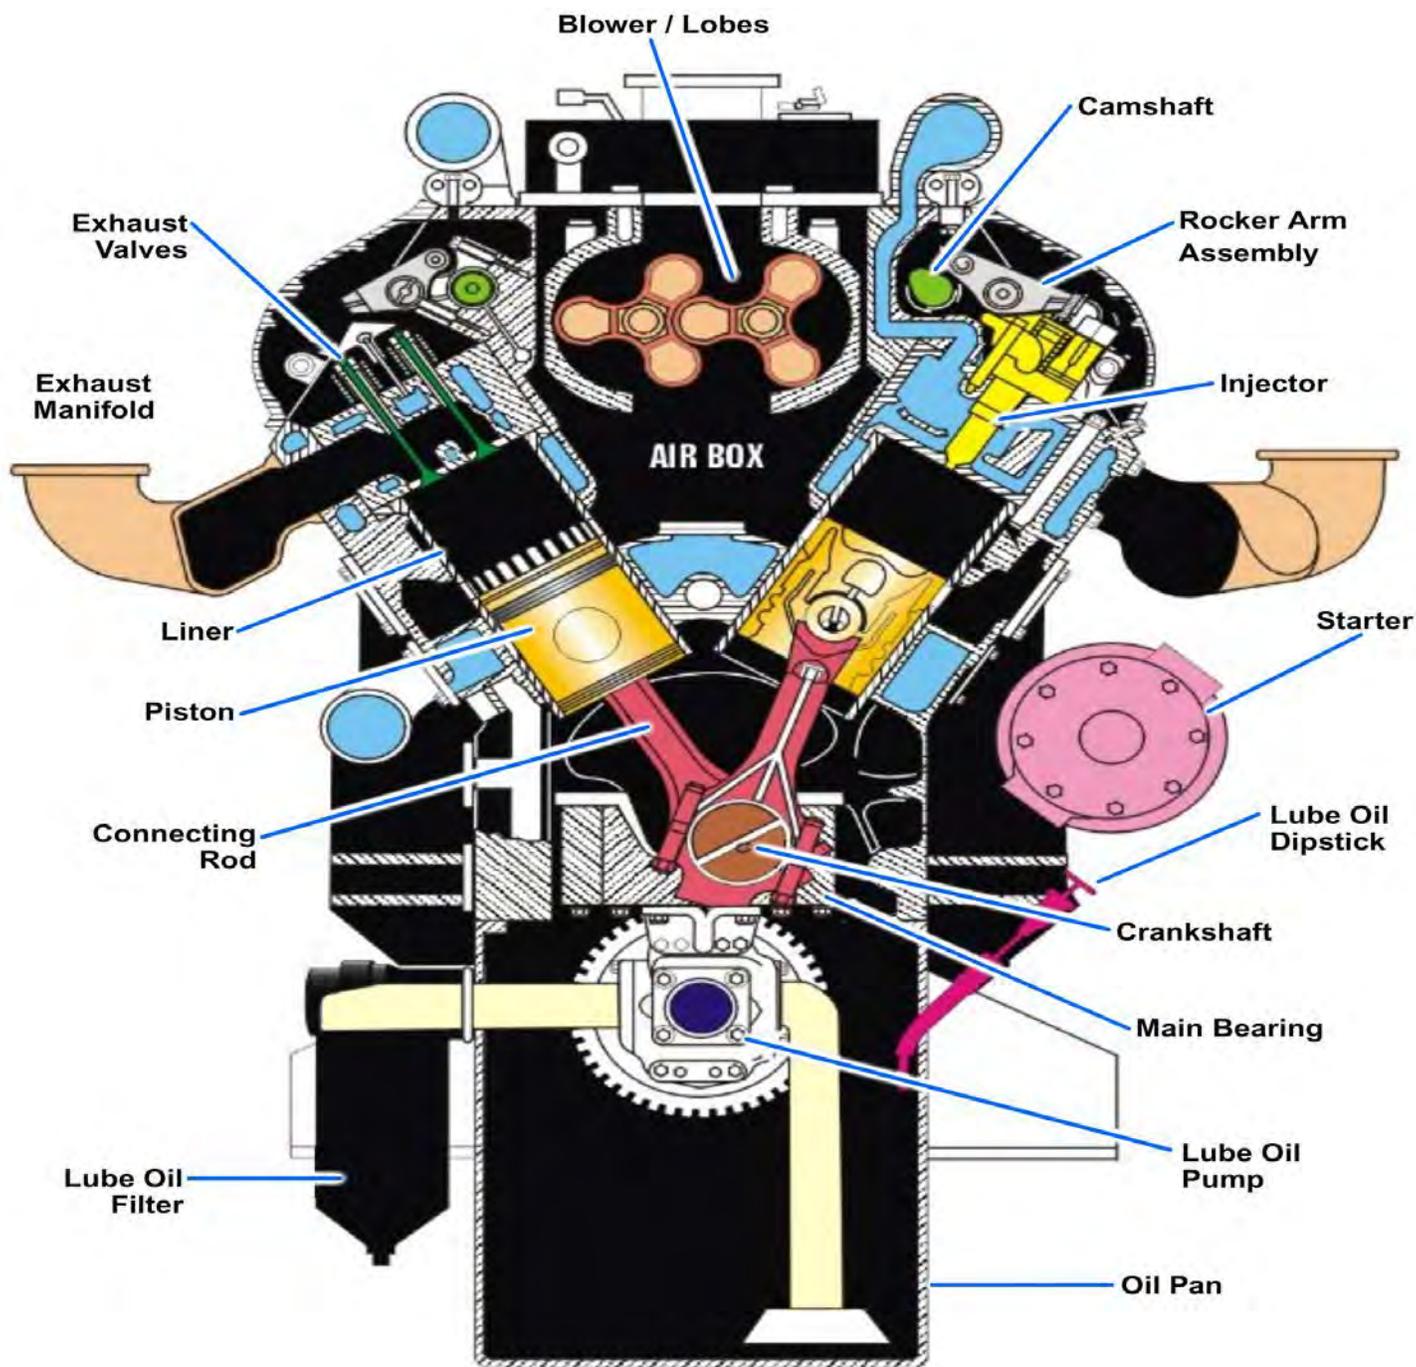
End cross section of a 2-stroke cycle, single-acting diesel engine.
